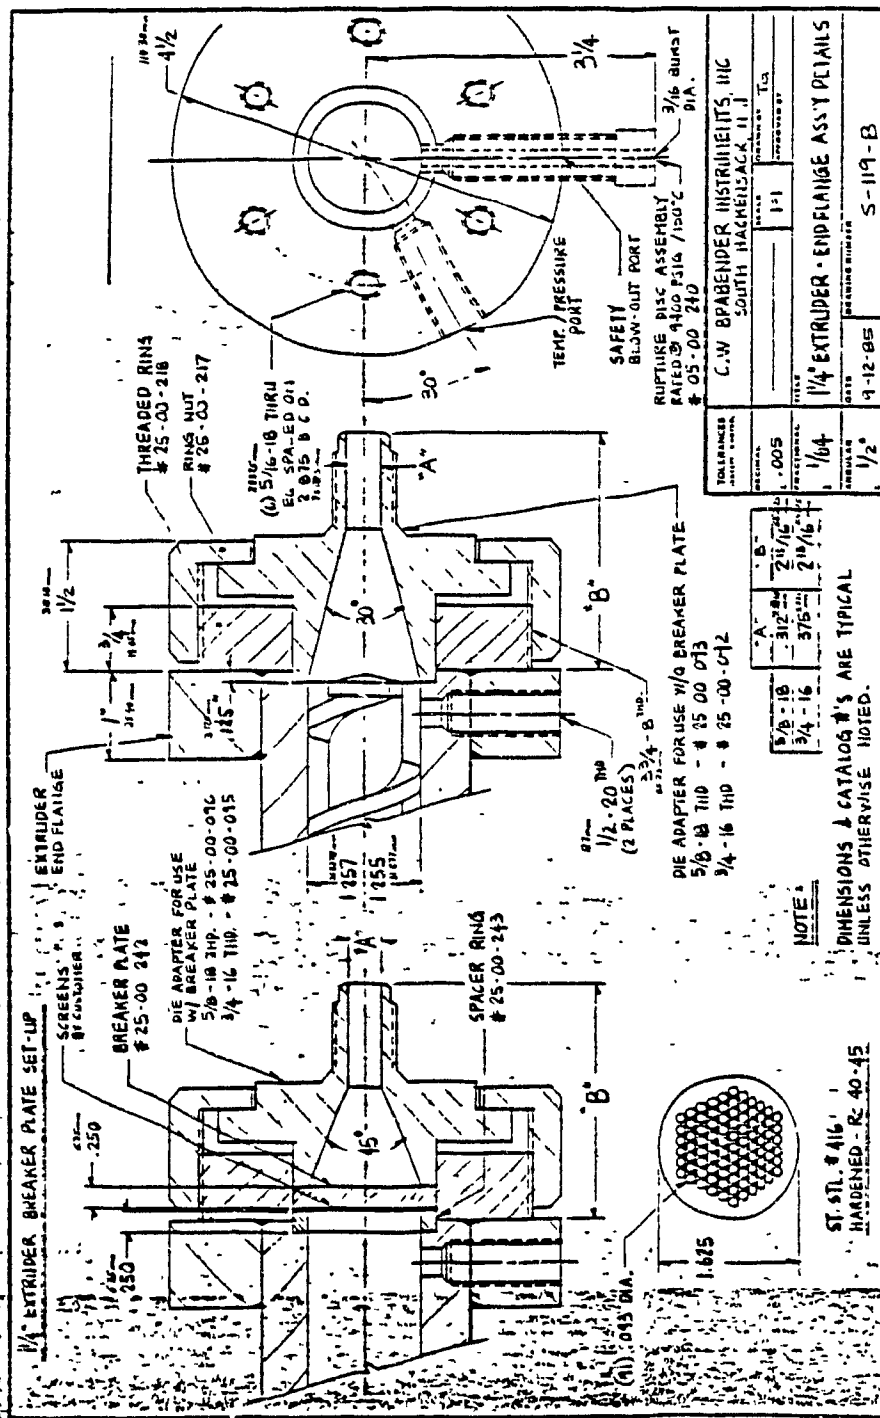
Extruder-Endflange Assembly Details (C.W.Brabender Instruments, Inc.).
